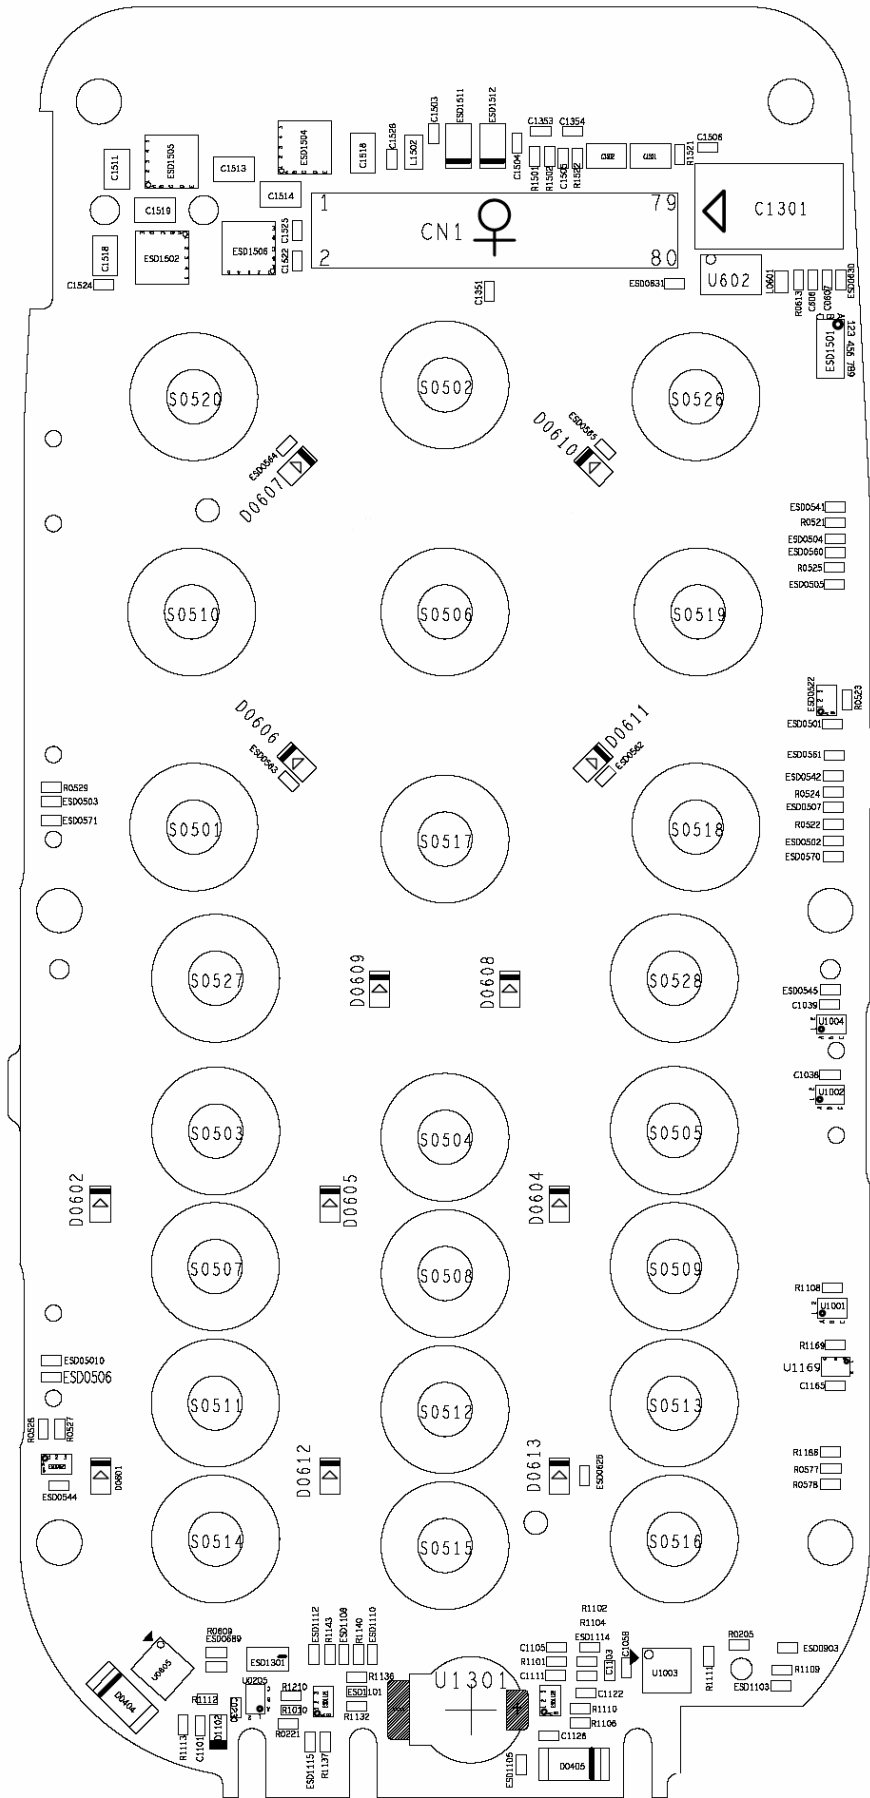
Mendelssohn Key Component Placement (lower board bottom view)
